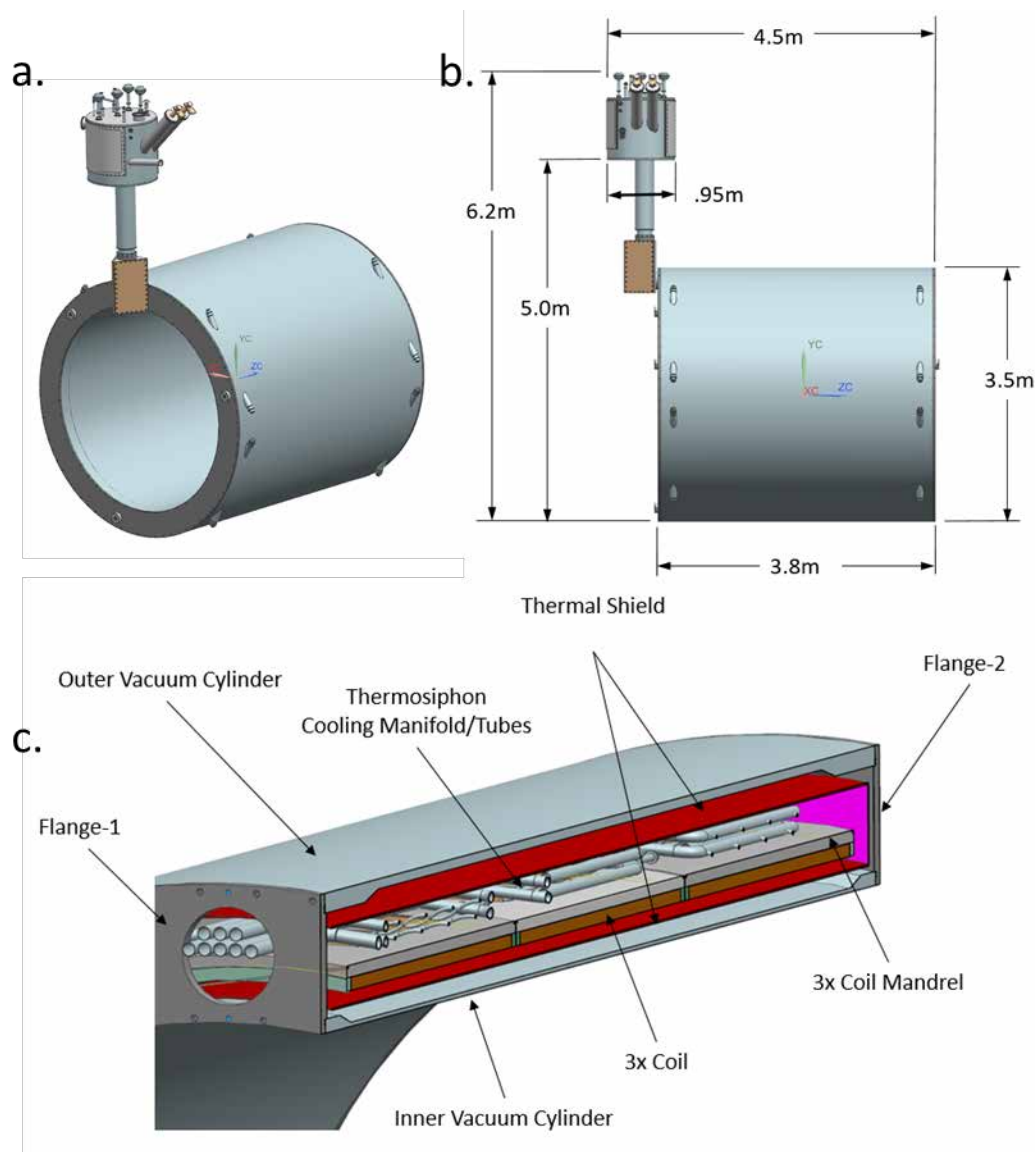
MARCO Magnet Overview a. 3D view, b. Overall dimensions, c. Assembly cross-section
